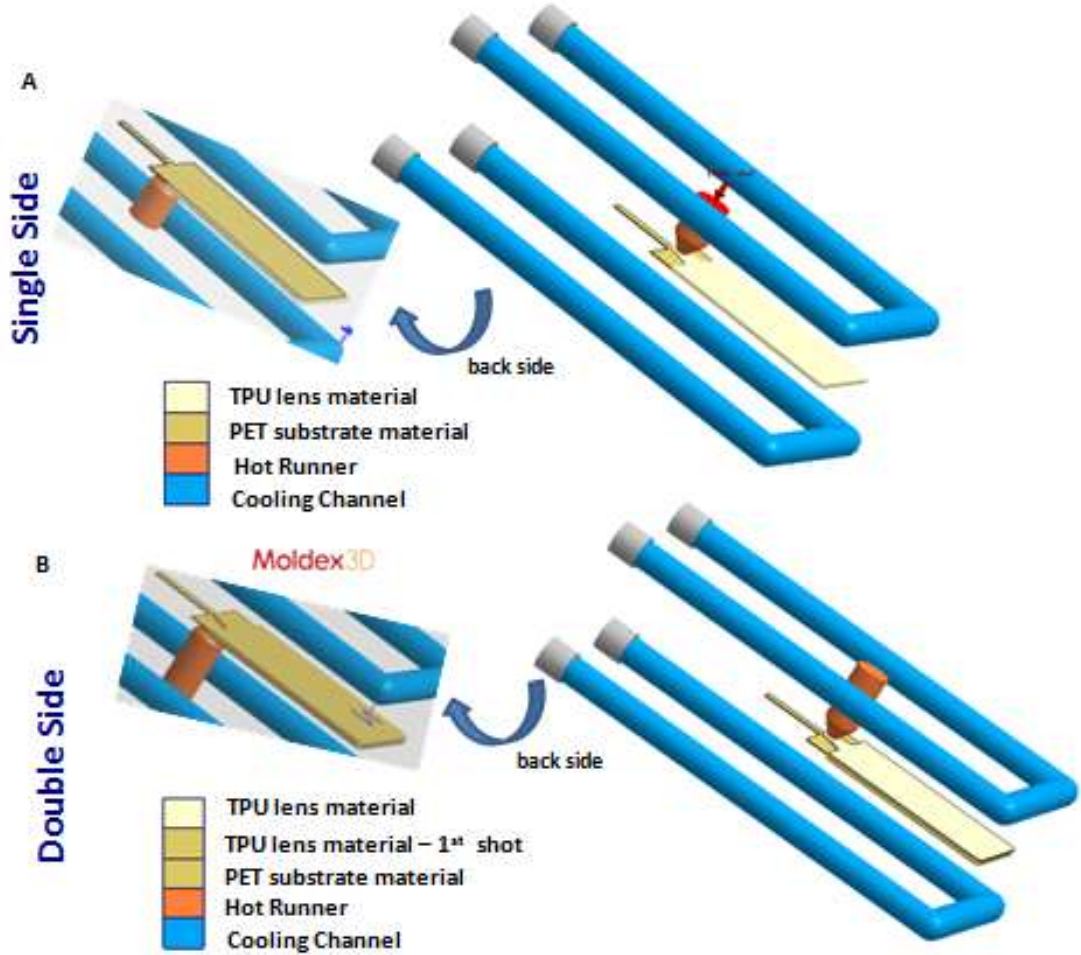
Model for (A) single and (B) double side encapsulated parts with hot runner and cooling channel design.
